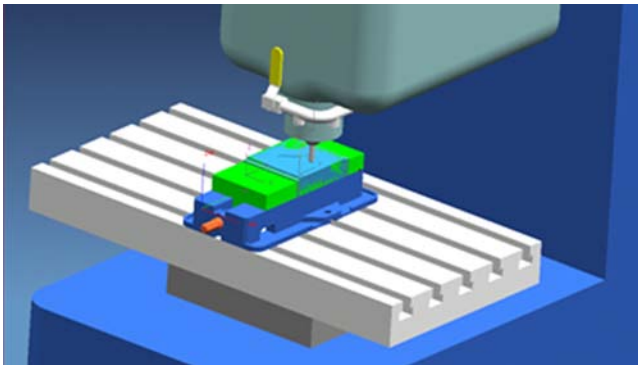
, Unigraphics Manufacturing Simulated Tool Path
